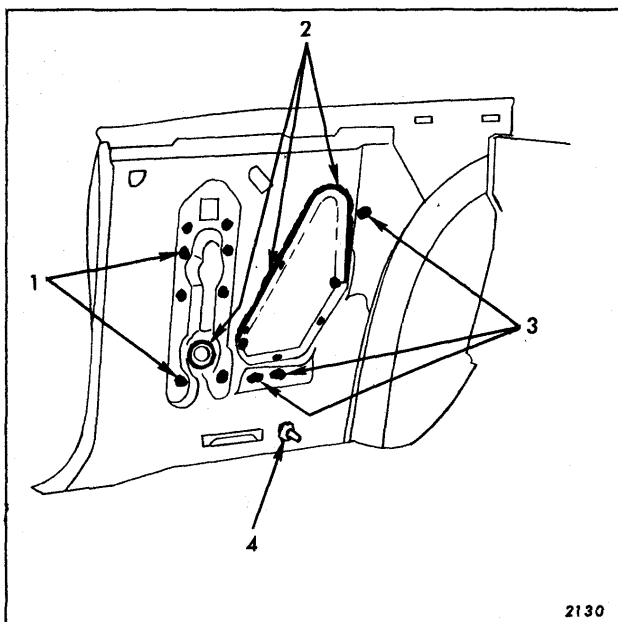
Rear Quarter Inner Panel Sealing - "67" Styles
